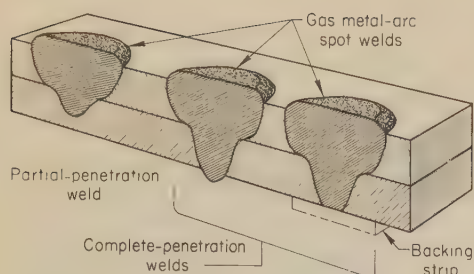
Shapes of typical gas metal-arc spot welds
